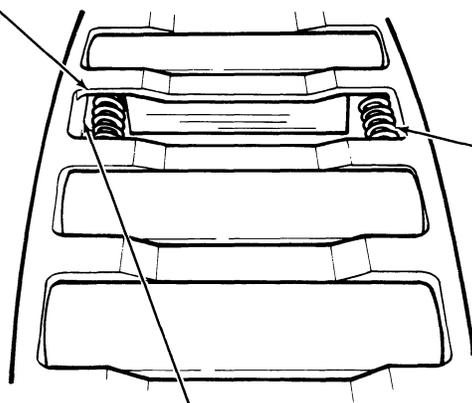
C. Freewheeling clutch (CL-41742 or CL-42250) — removal or installation of sprag
